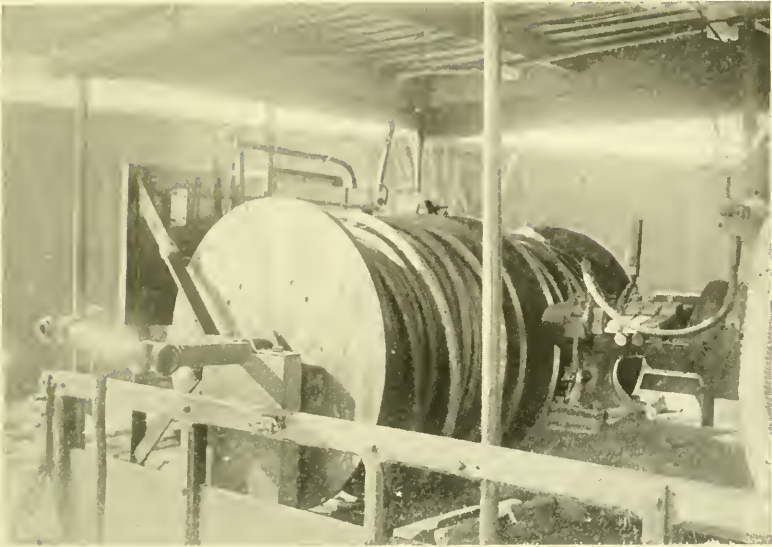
SPOOLS OF 4 PER CENT. COPPER WIRE SHOWING WINDING CRANK.
